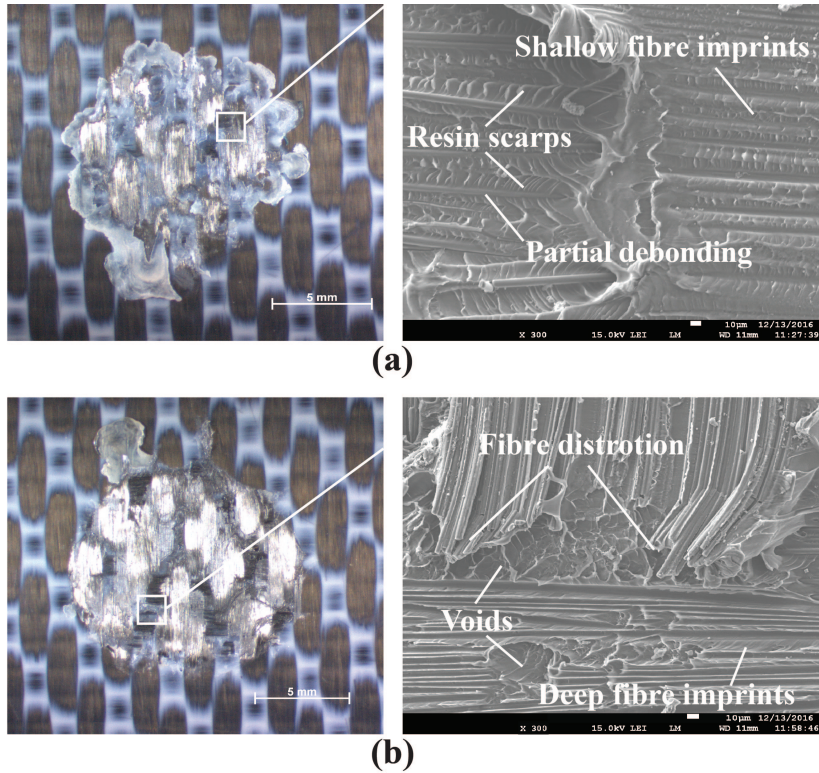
Fracture surfaces (left) and SEM details (right) showing secondary failure types in SSW joints welded at the optimum energy in (a) Jig 1 and (b) Jig 2. The SEM micrograph in (a) shows significant presence of resin cusps, indicating shear failure took place in the thermoplastic resin [19]. In contrast, void imprints combined with deep fibre imprints and fibre distortion are found in the SEM micrograph in (b). The scale bars are 5 mm (for stereo-microscopy) and 10 μm (for SEM).
